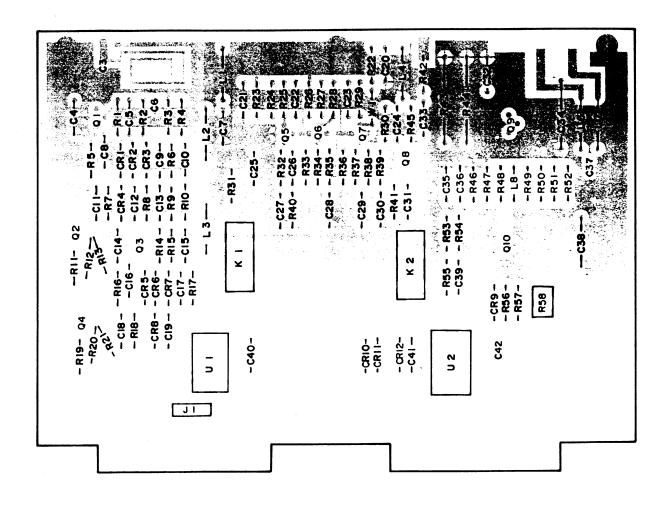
A2 ALC Amplifier Board Assembly Component Locations.
